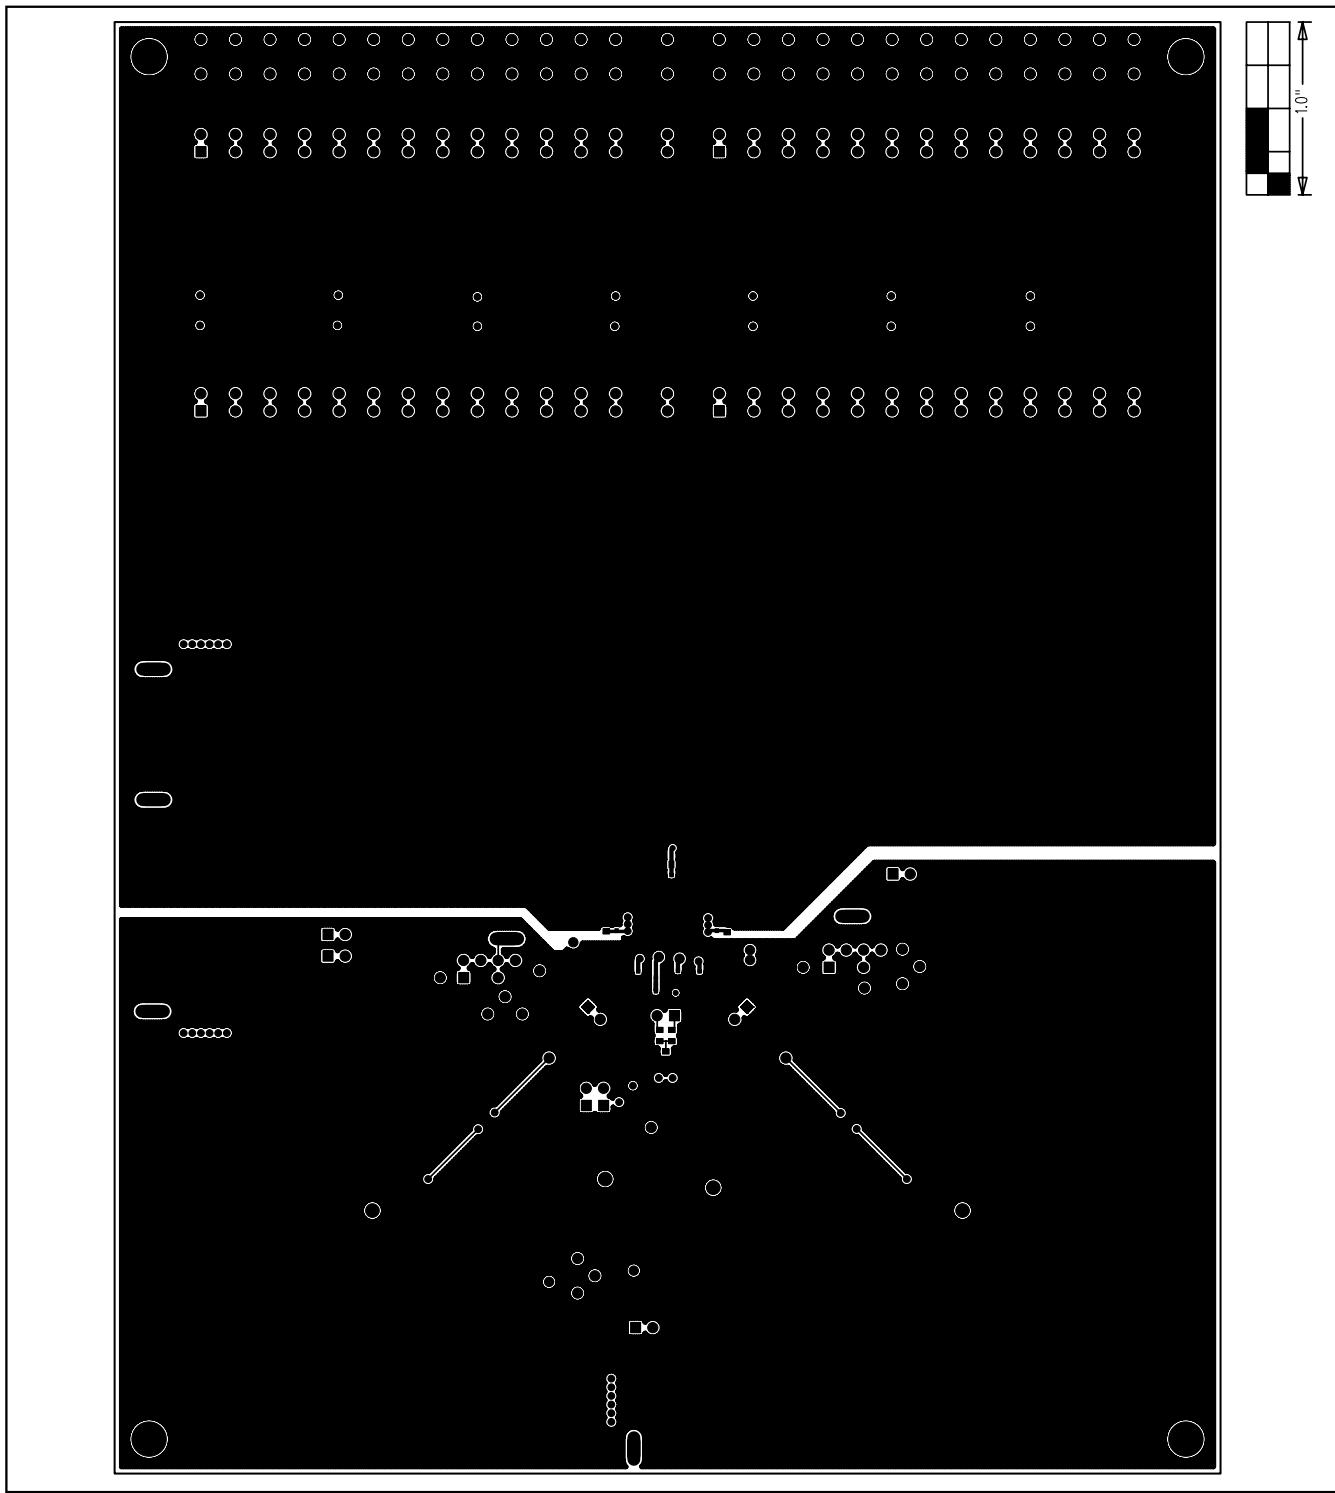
MAX1217/MAX1218/MAX1219 EV Kit PC Board Layout—Solder Side
